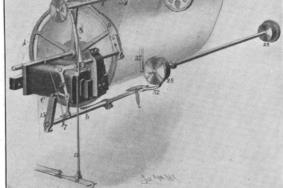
DETAILS OF PAPER FEED AND RELEASING GEAR.
